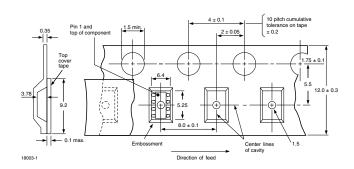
Tape Dimensions, 2000 Parts per Reel
